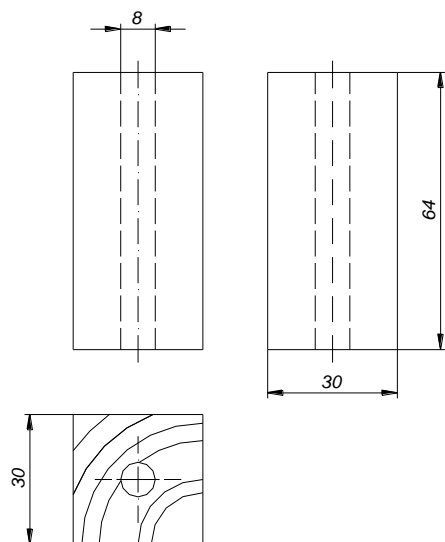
Specimen (base) for welding the dowel parallel to the grain
